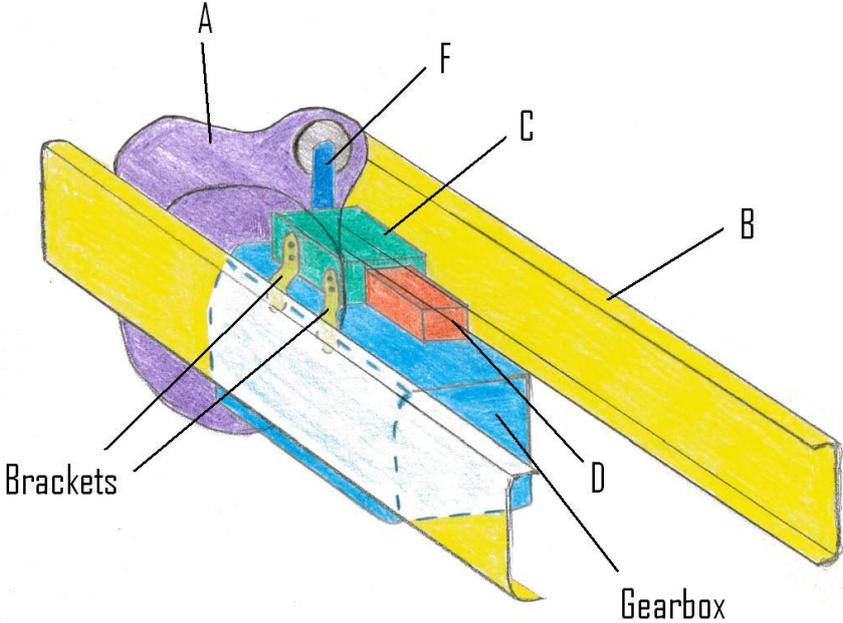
Concept 17. Both pumps are mounted on the gearbox with a cardan shaft connecting pump C to the PTO.
